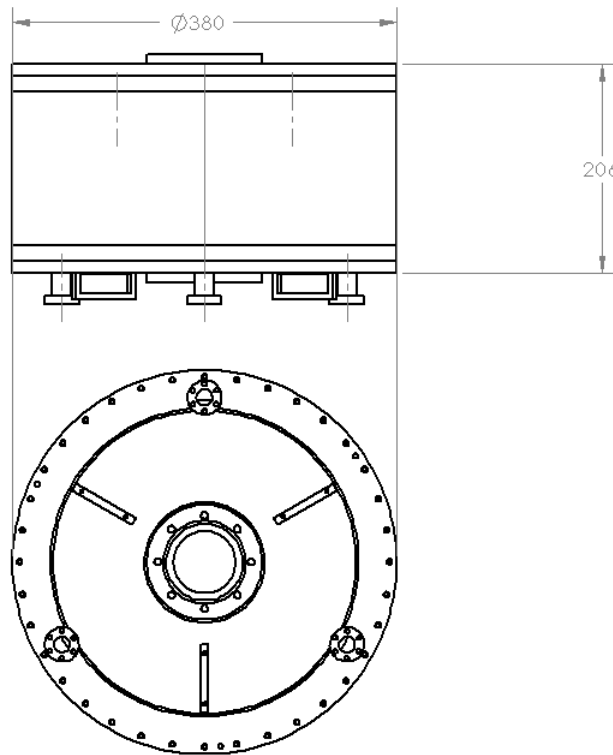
Drawing of the SV, full designs in Appendix H.
